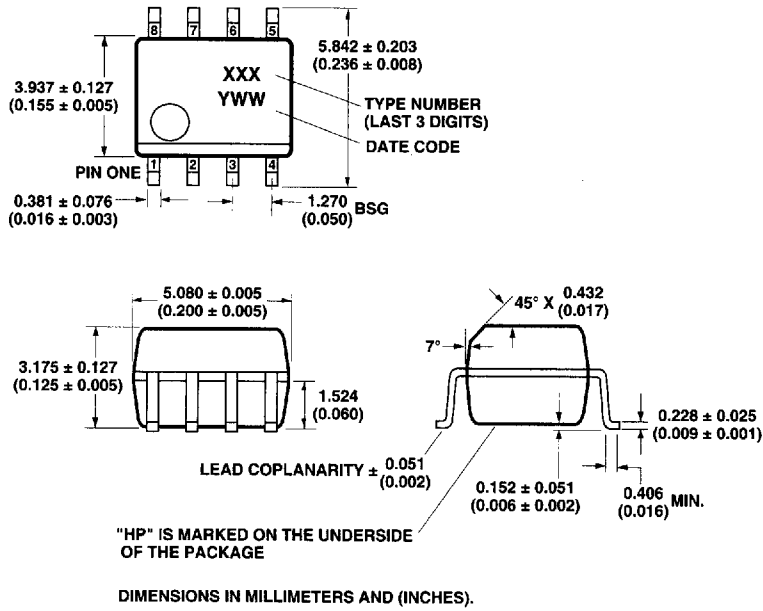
HCPL-0466 Outline Drawing (8 Pin Small Outline Package).
